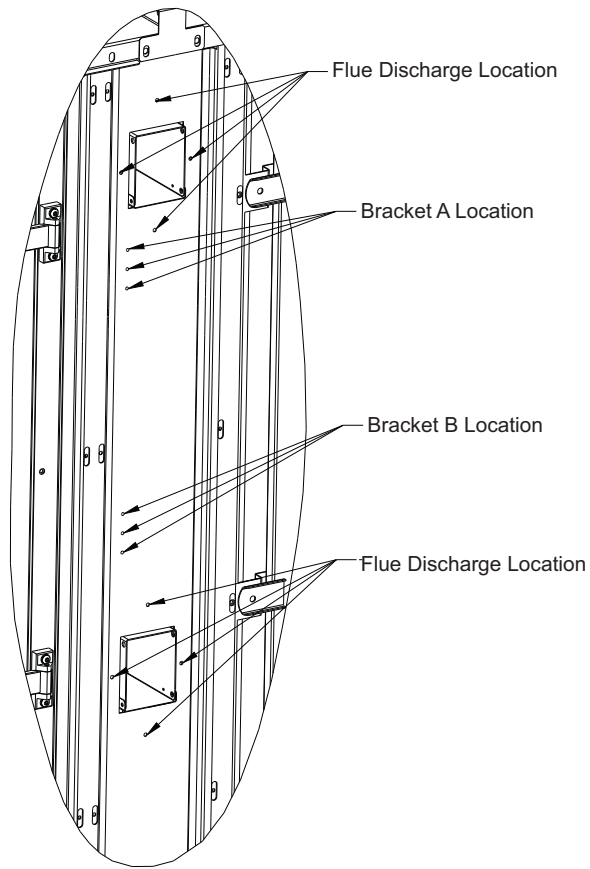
Flue Discharge Deflector Mounting Position — 27.5-50 Ton, High Heat and 55-100 Ton, Low Heat (Detail View)
